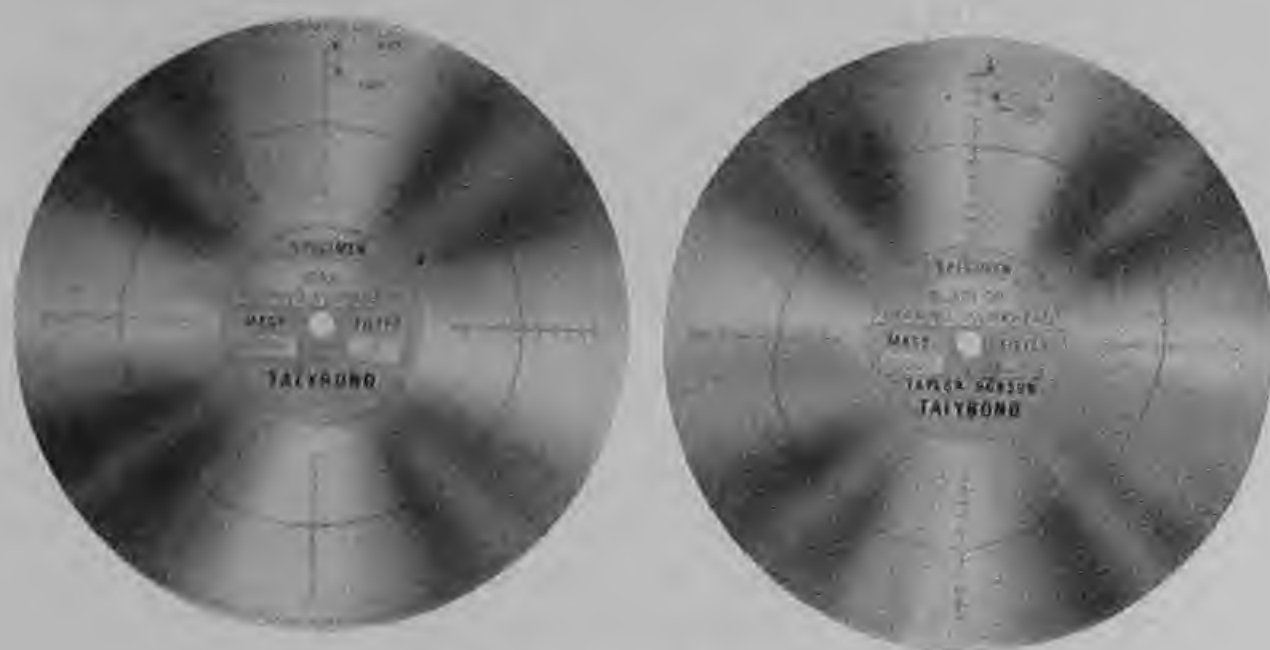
Comparison of air bearing and plain oil bearing workheads—roundness of workpiece (after Trayner, Ref. 15)
